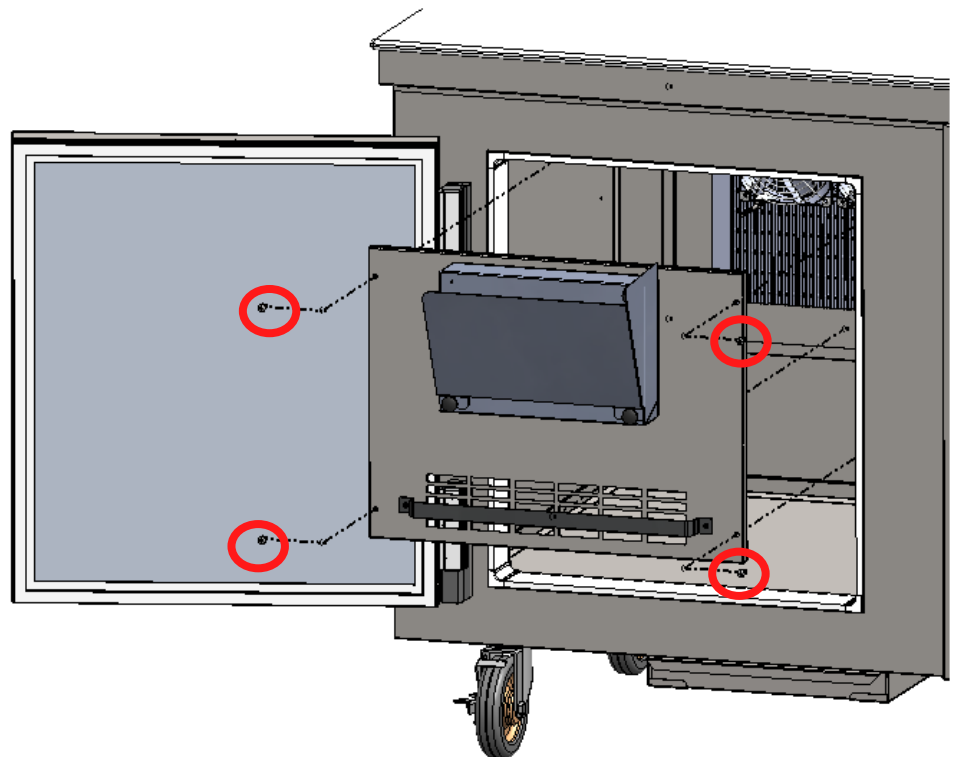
B.11.1c Evaporator Fan Assembly Removal
